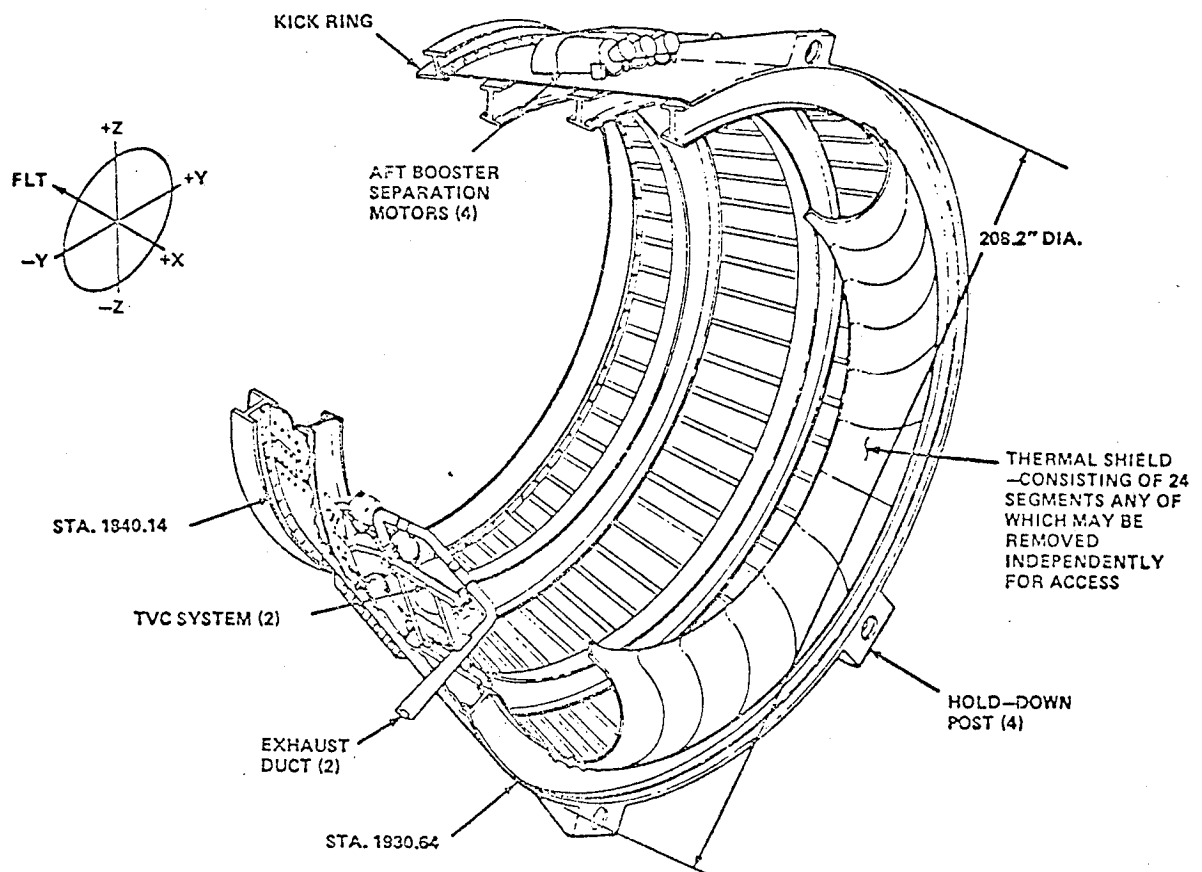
Space Shuttle Aft Skirt Configuration
